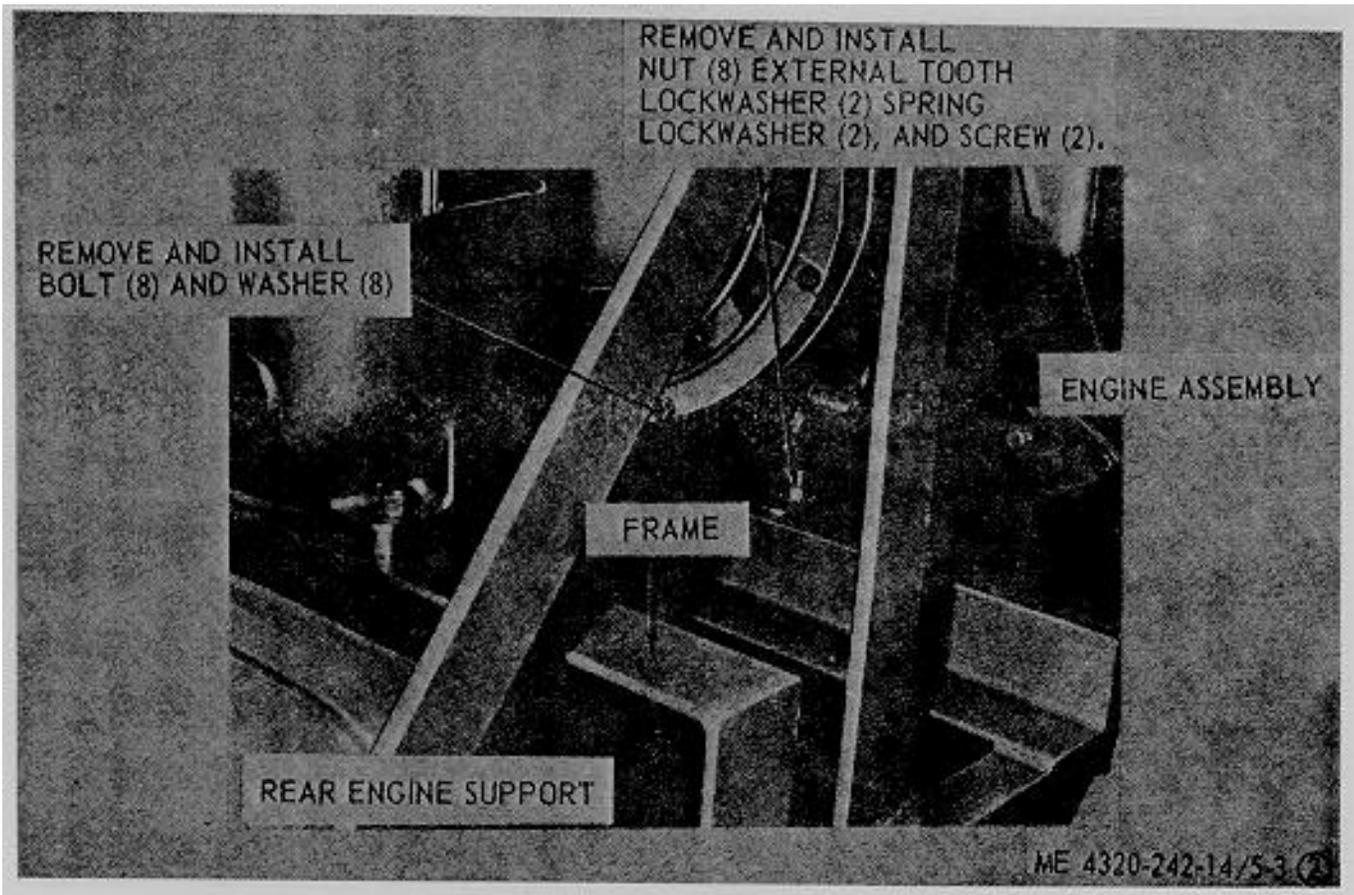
Engine, removal and installation (Sheet 2 of 2).
